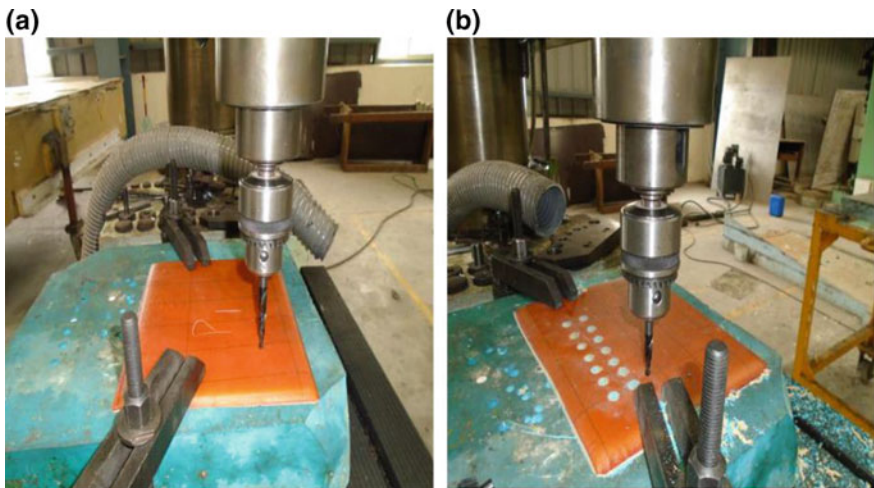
a Kevlar Laminates setup and b drilled holes on Kevlar Laminates
